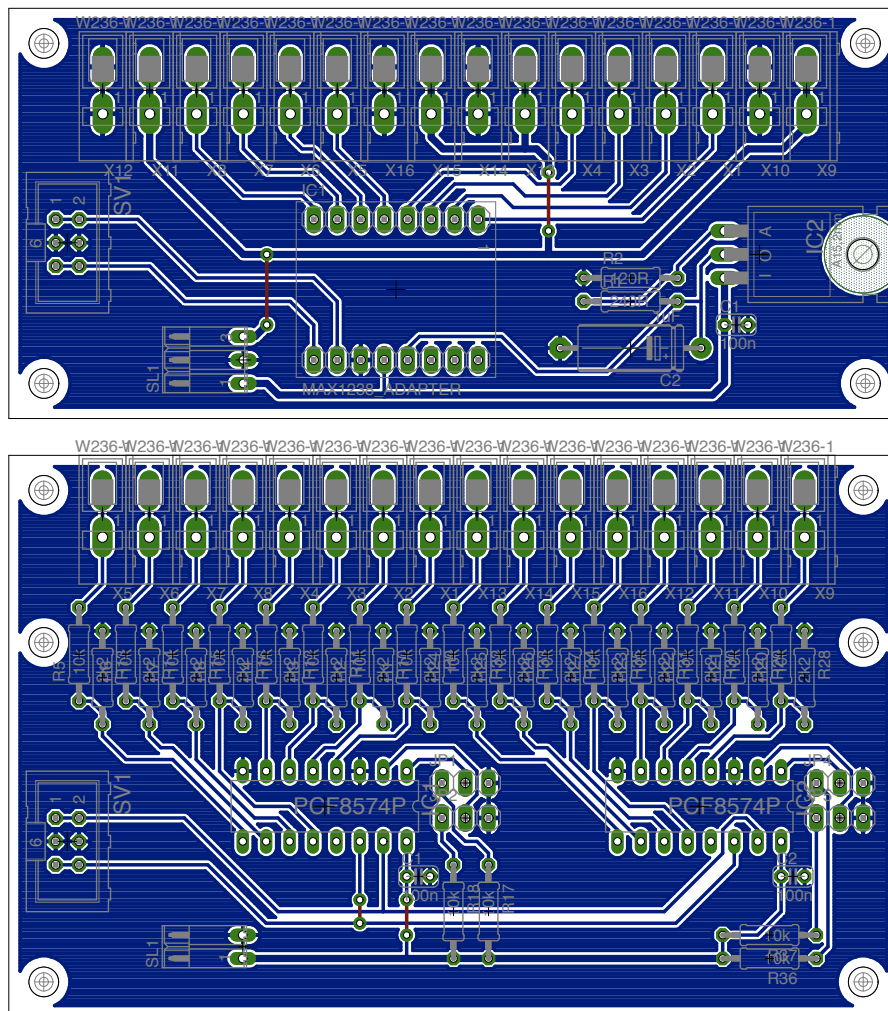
PCB layout of the ADC module for gas pressure sensors. The one-sided layout has a size of 97 mm \times 44 mm (upper part) and 97 mm \times 61 mm (lower part). Both PCBs have drill holes matching the layout of the CAN to I²C converter and against each other to allow stacking with 20 mm straight connectors.
